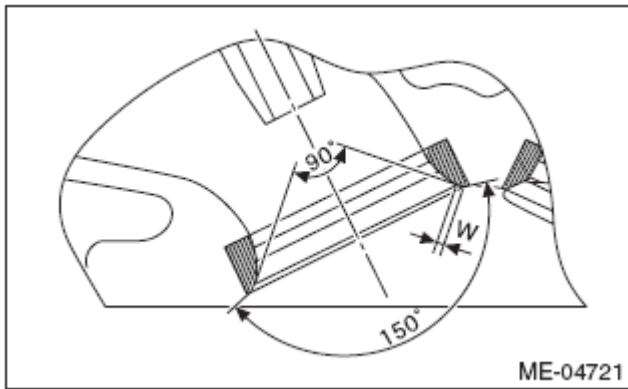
Identifying Contacting Width Between Valve And Valve Seat
